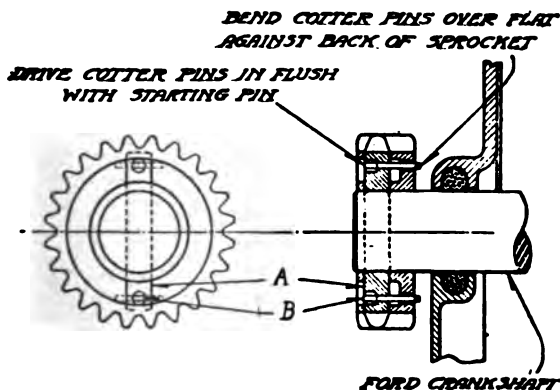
Correct assembly of cranking sprocket for Heinze-Springfield installation on Ford car
